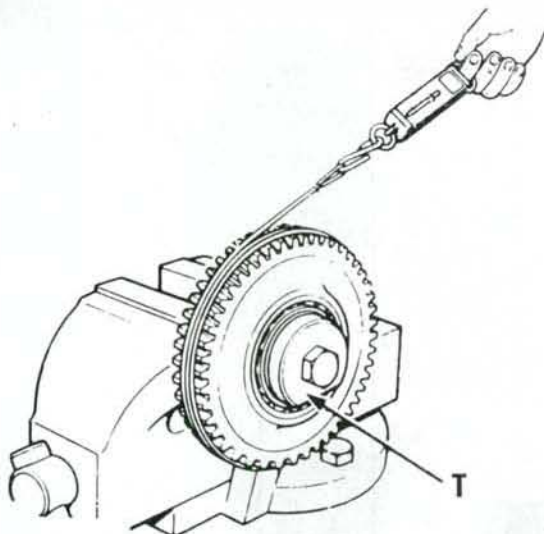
Check rolling torque of idler gear as described in text. Special tool FT 3169 is shown at (T).
